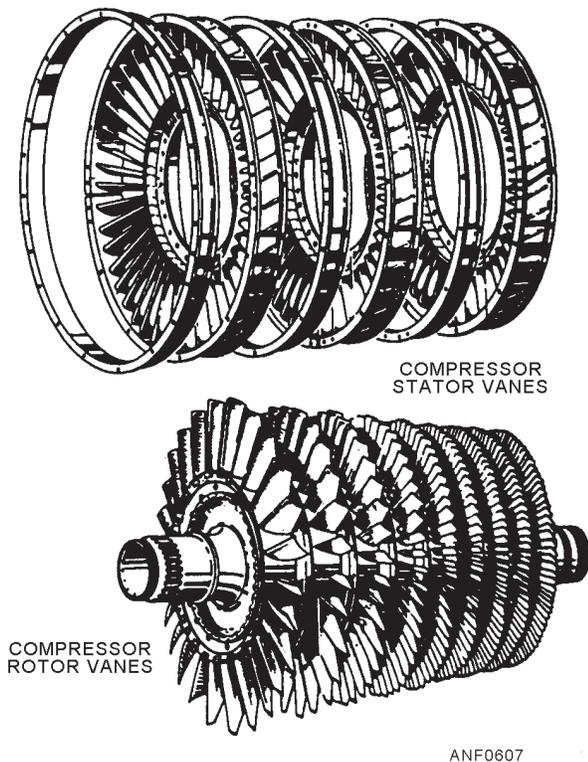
Stator and rotor components of an axial-flow compressor.
